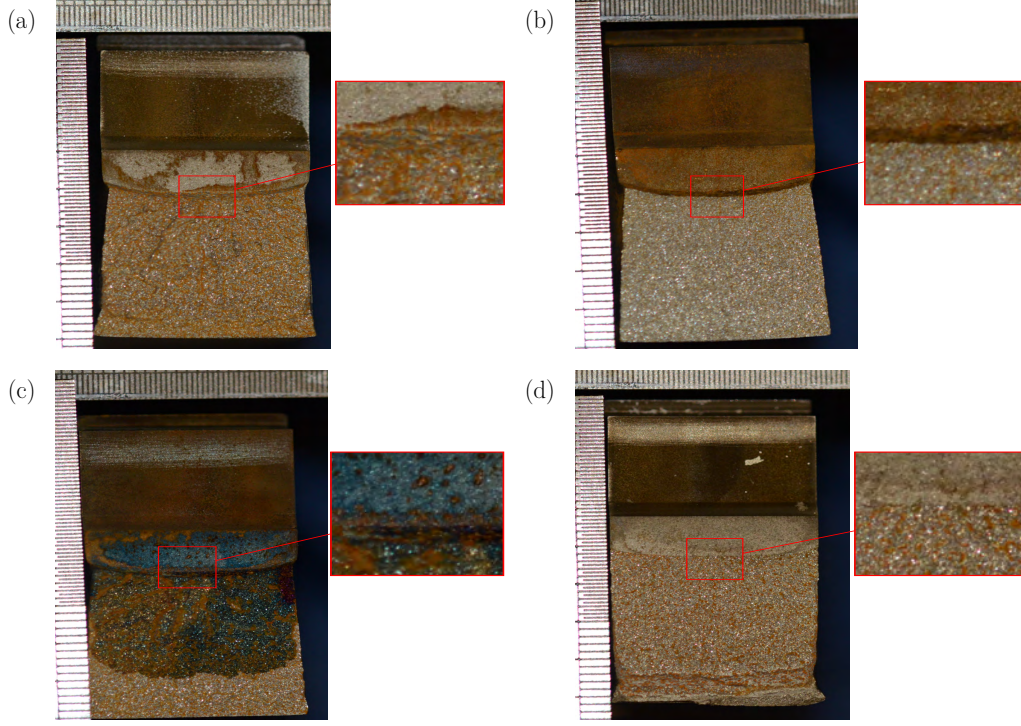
Fracture surfaces of deeply notched specimens with thickness of 20 mm (D20 series) tested at (a) 20 °C, (b) -20 °C, (c) -40 °C, and (d) -70 °C. Magnified regions depicting the transition from fatigue pre-crack to ductile tearing or cleavage fracture.
